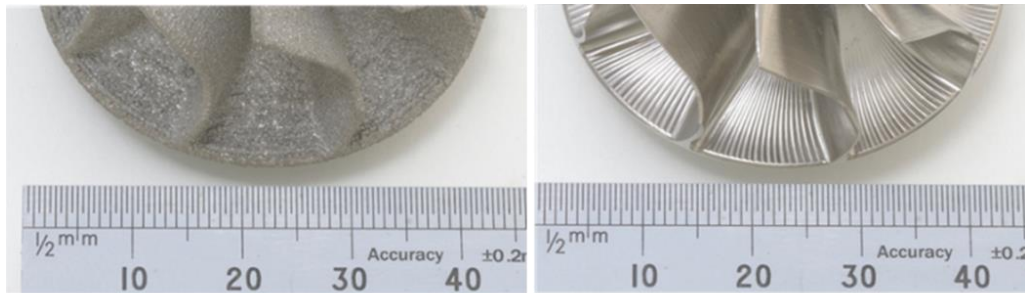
EBM turbocharger wheel surface detail before and after the surface finishing.
